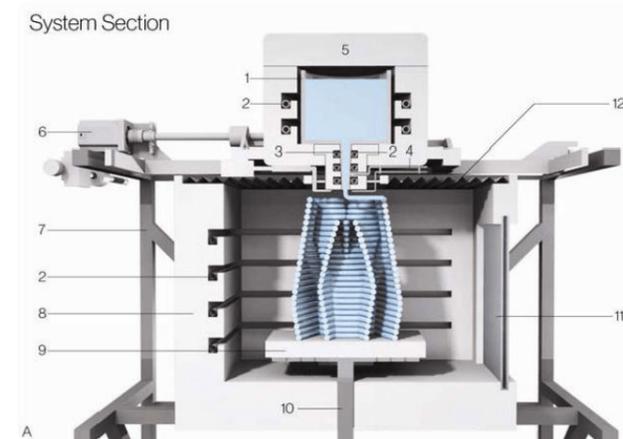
h: G3DP dual heated chamber Glass printer by MIT 1. crucible, 2. heating elements, 3. nozzle, 4. thermocouple, 5. removable feed access lid, 6. stepper motors, 7. printer frame, 8. print annealer, 9. ceramic print plate, 10. z-driven train, 11. ceramic viewing window, & 12. insulating skirt
